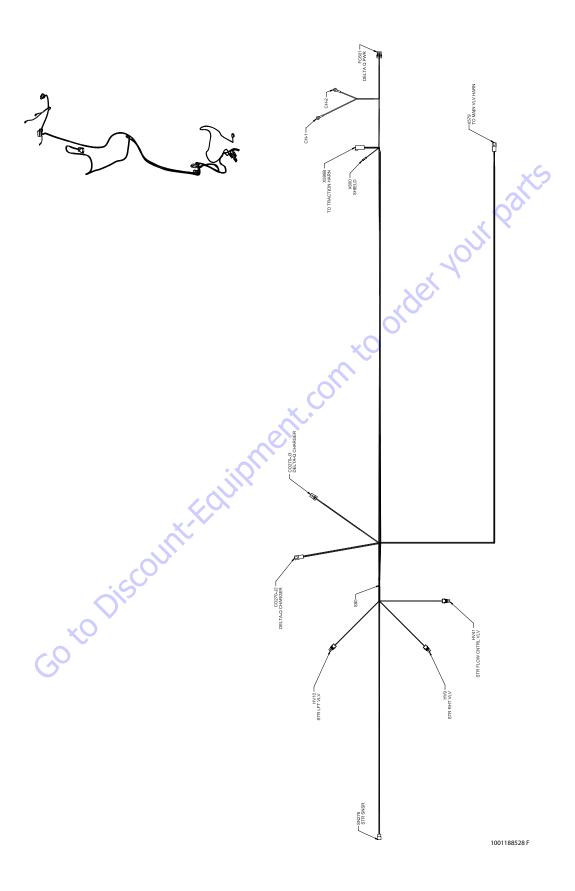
Chassis Steer/Brake Harness - Sheet 1 of 2
